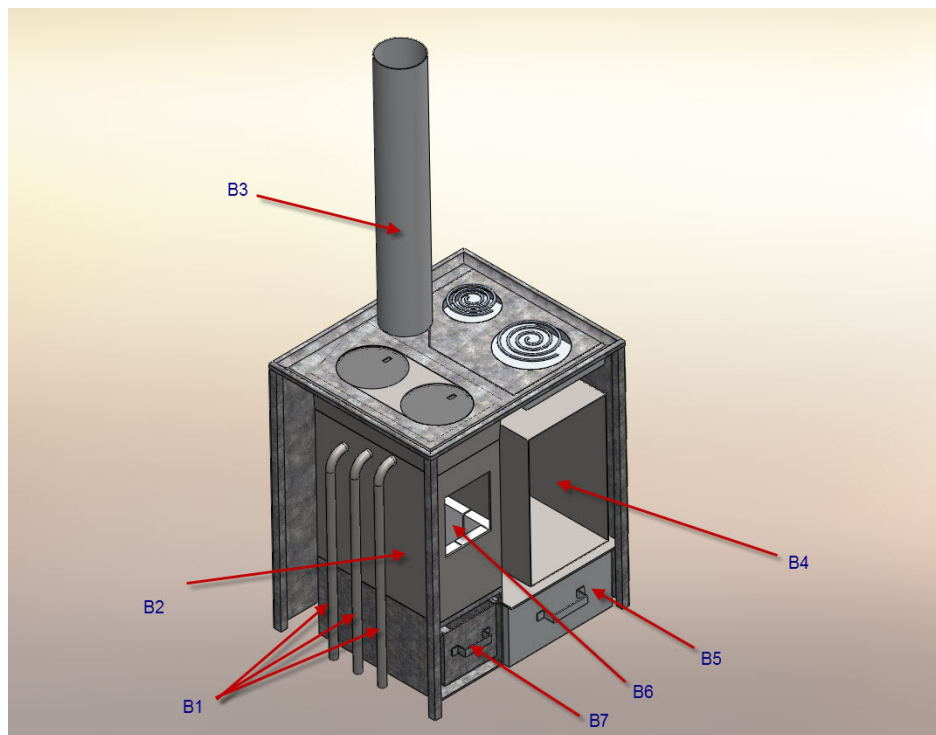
Isometric View of Hybrid Cookstove Design with Front and Side Panels Removed
